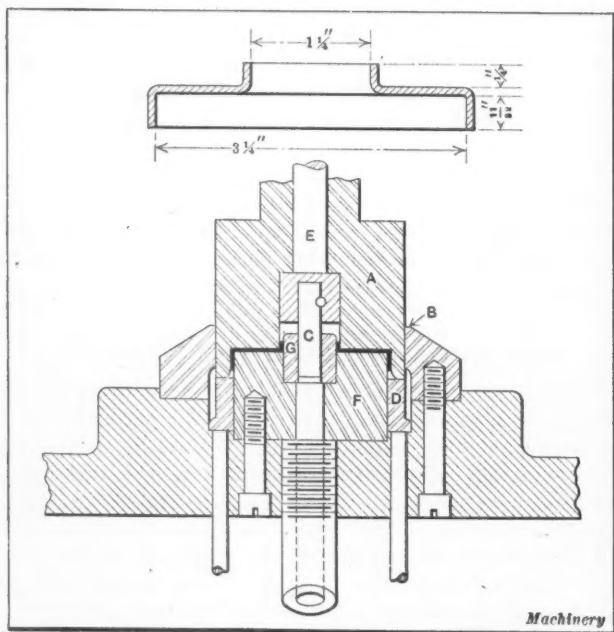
Blanking and Forming Die used in the First Operation on the Shell
